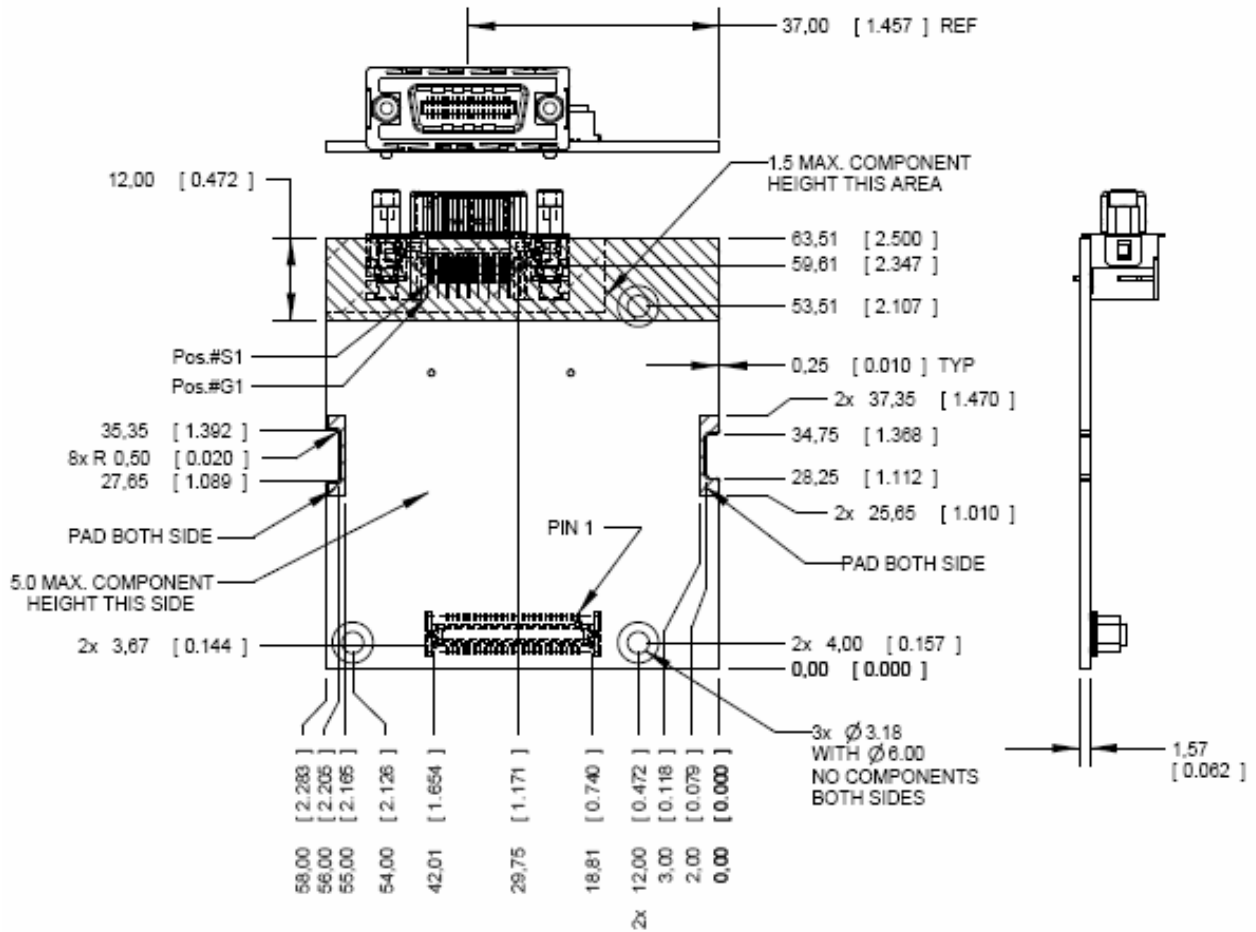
SAS I/O Module Dimensions; Top and Side Views
